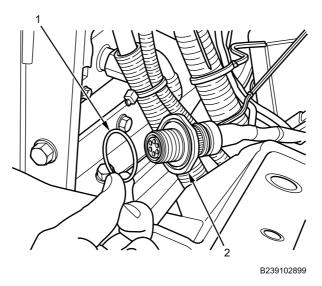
HVAC Control 2 Wiring Harness O-Ring.
